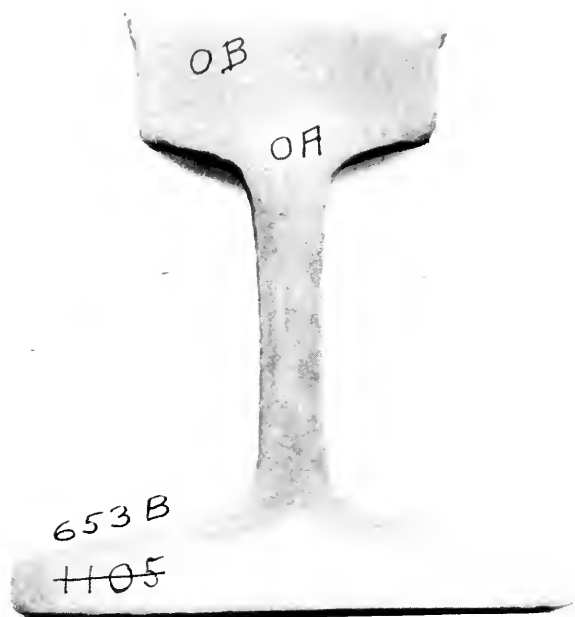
B. LIGHT ETCHING OF RAIL 653.
